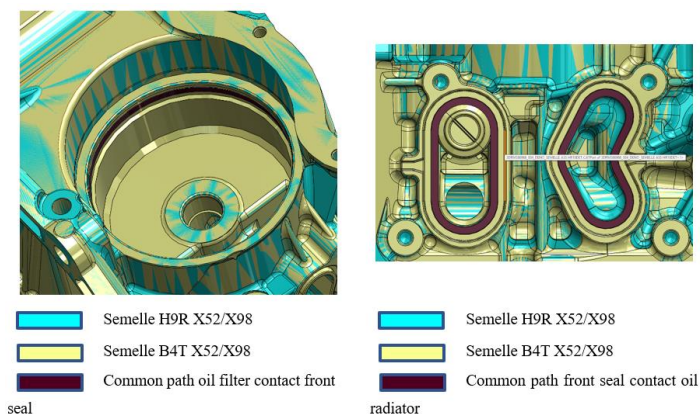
Overlap of the contact surfaces of the oil filter (left) and oil cooler (right)
